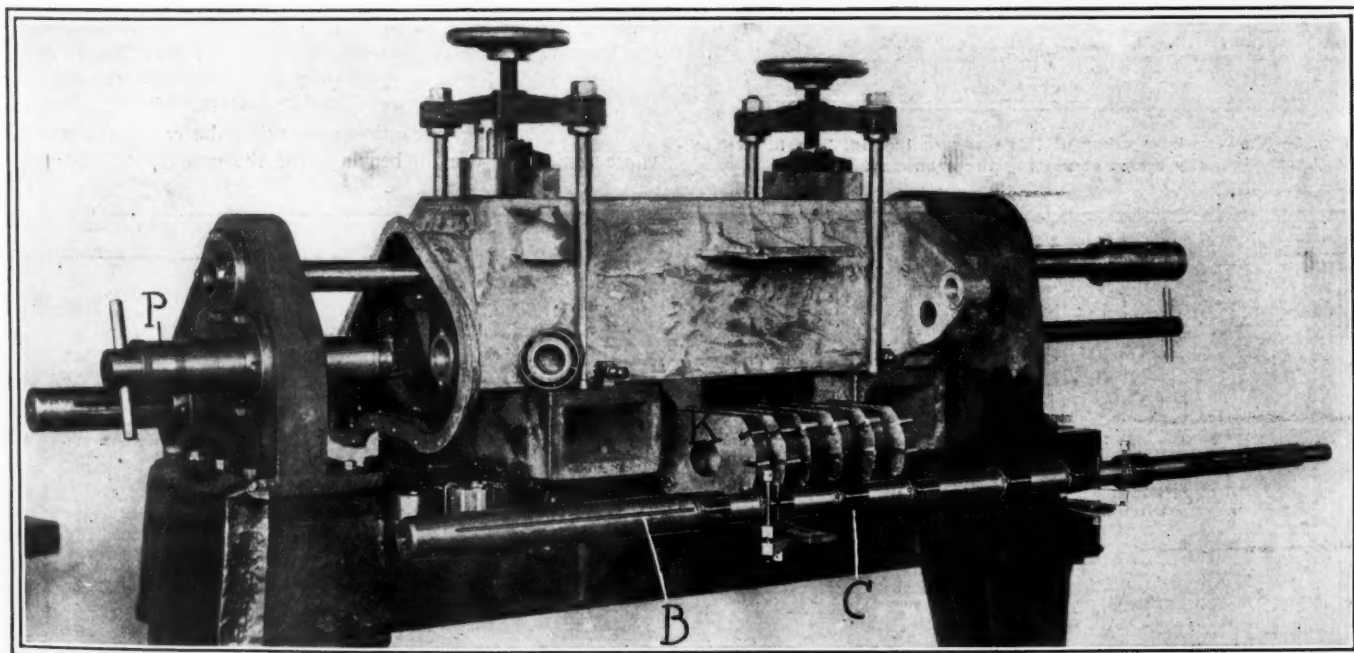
Line reaming fixture for reaming bored openings for carrying camshaft and crankshaft bearings
